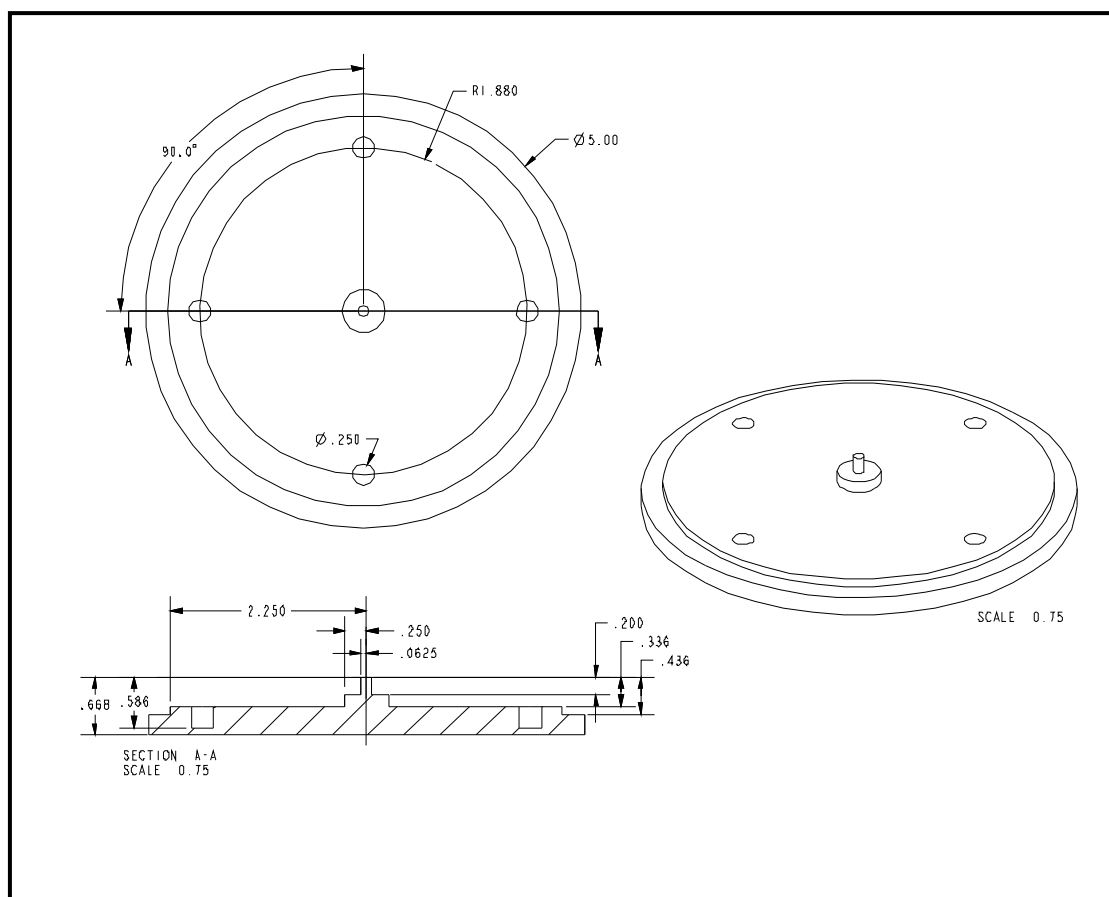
CAD Drawing of the Multi-Sampling Port JSR Mold – Bottom Plate
